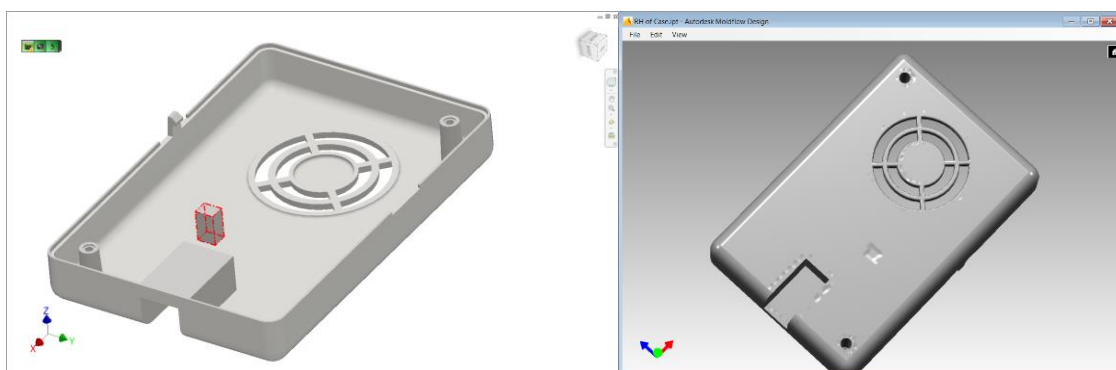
MOLDFLOW DESIGN: SINK MARKS AND FINISHED PART VIEW
